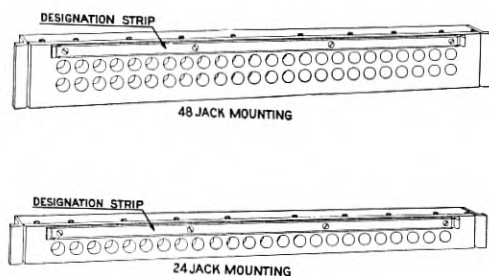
Typical Assembly of Jack Mounts for Panel Mounted Test Board
